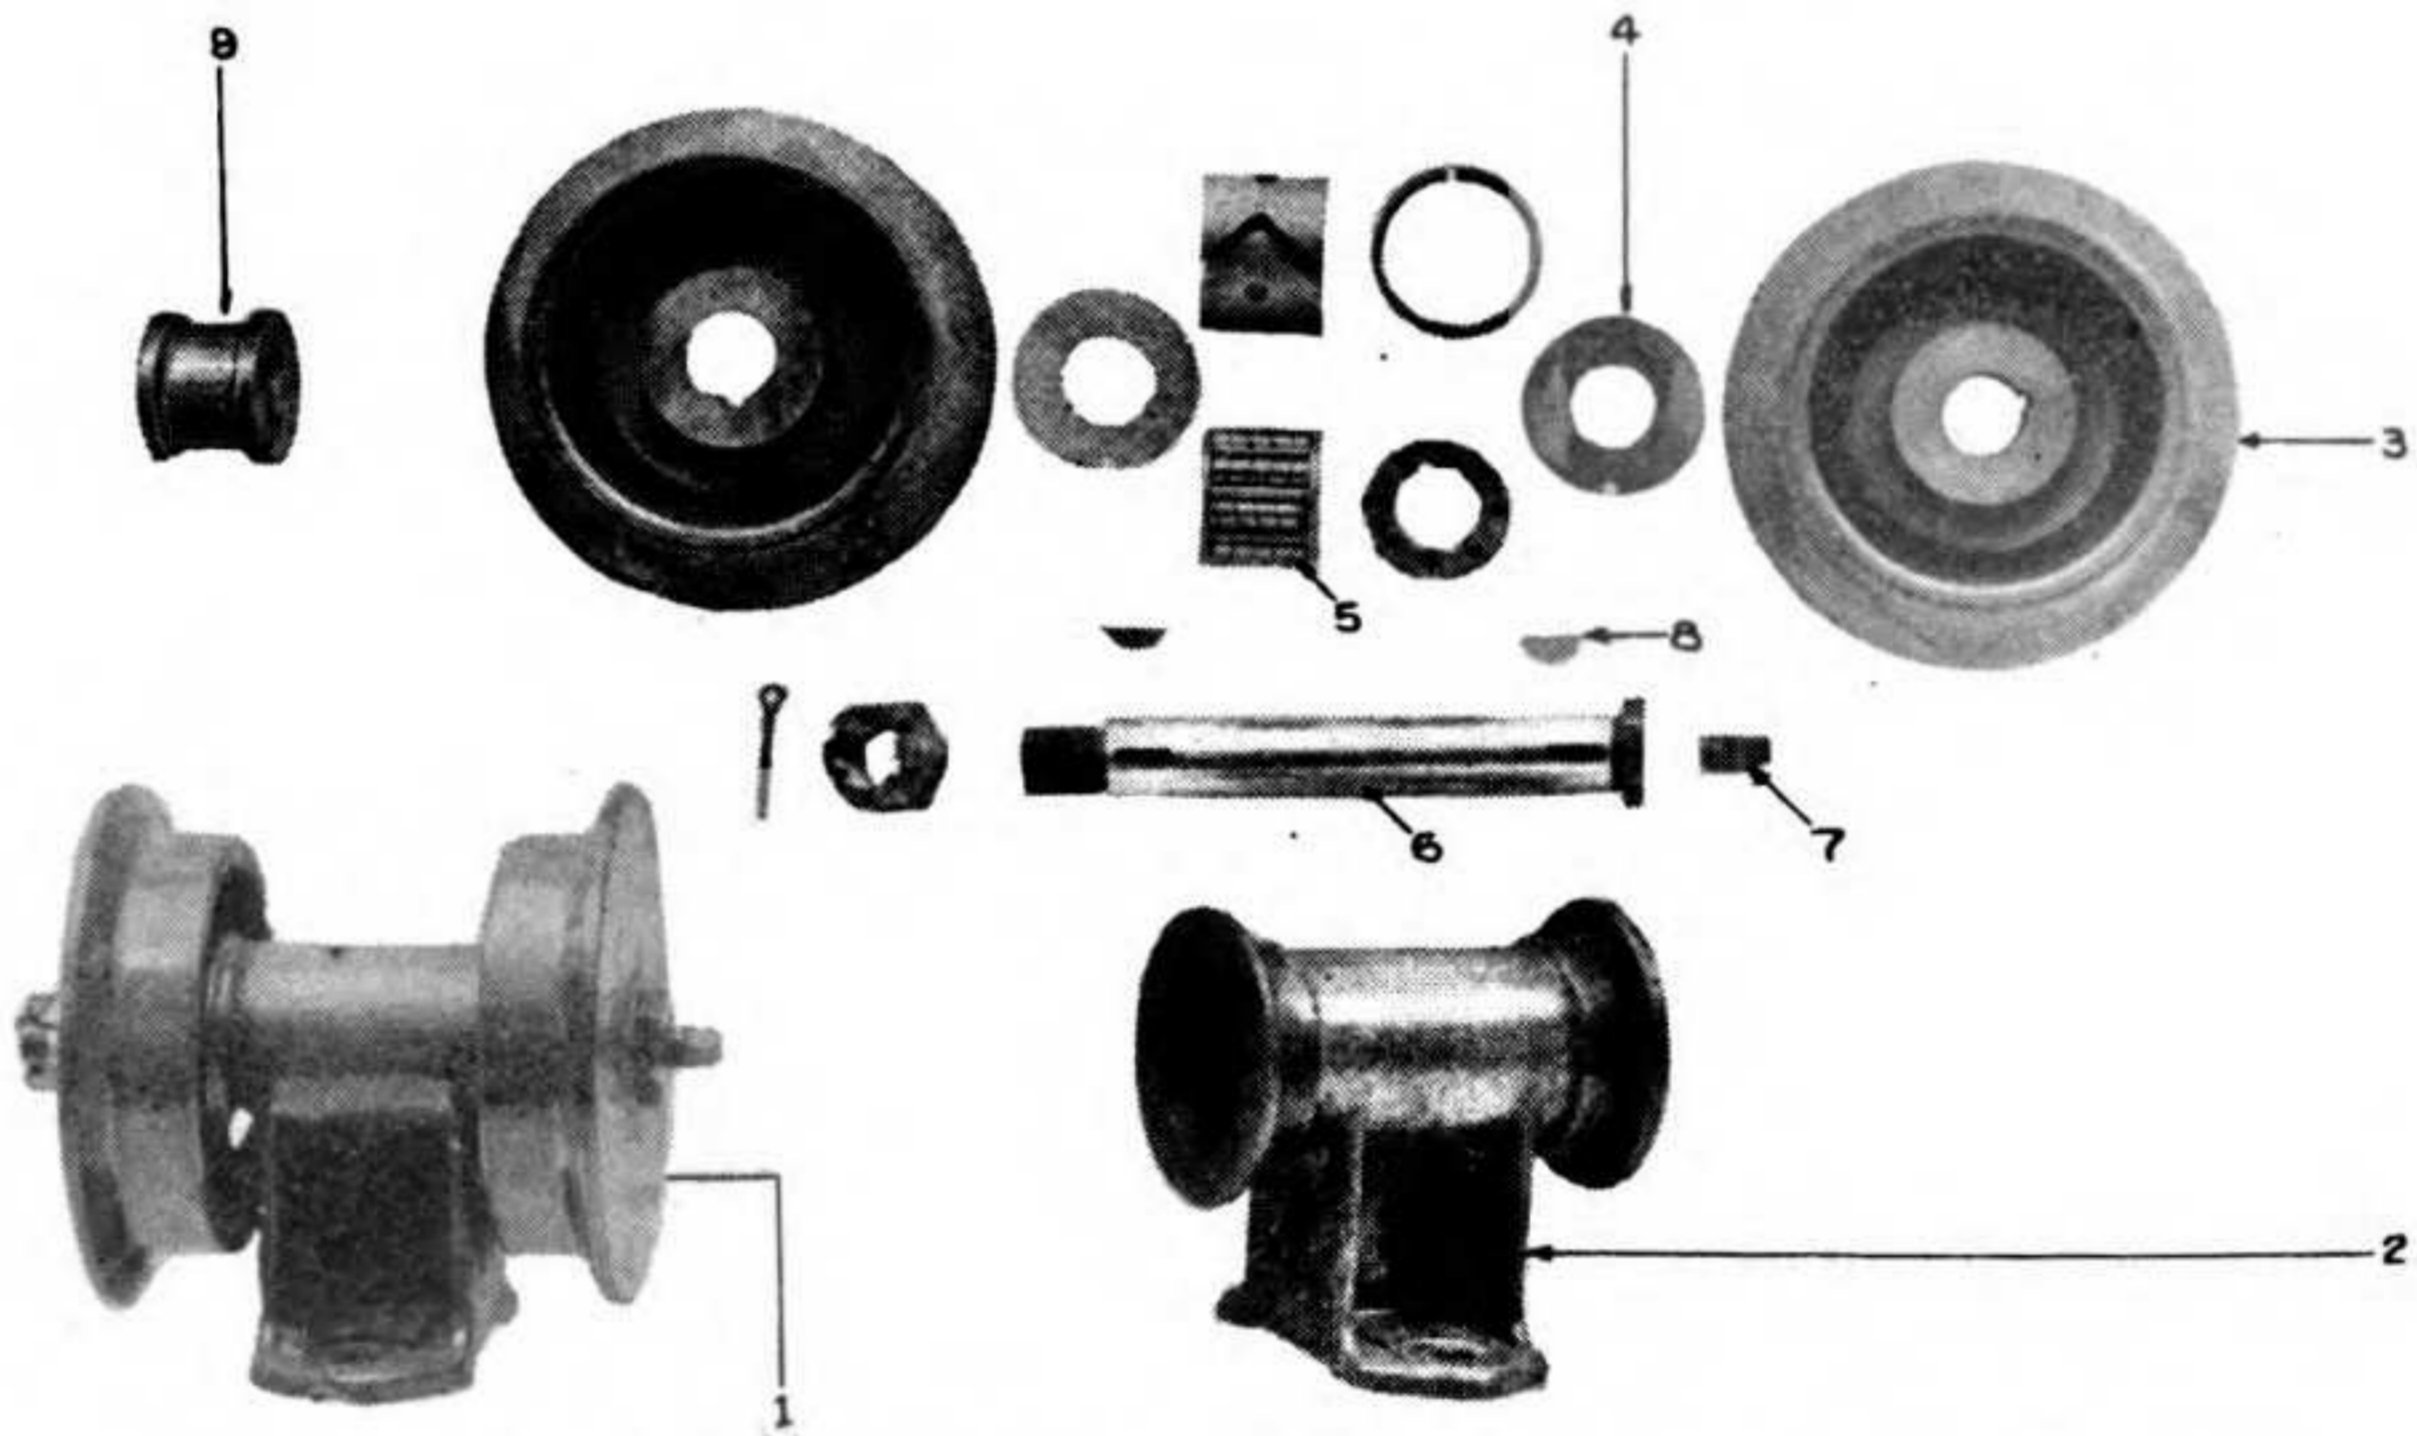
TRACK SUPPORTING ROLLER AND PARTS
